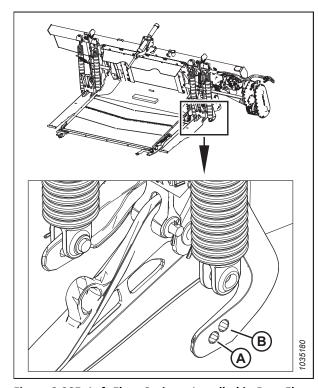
Left Float Spring – Installed in Rear Float Lever Hole
